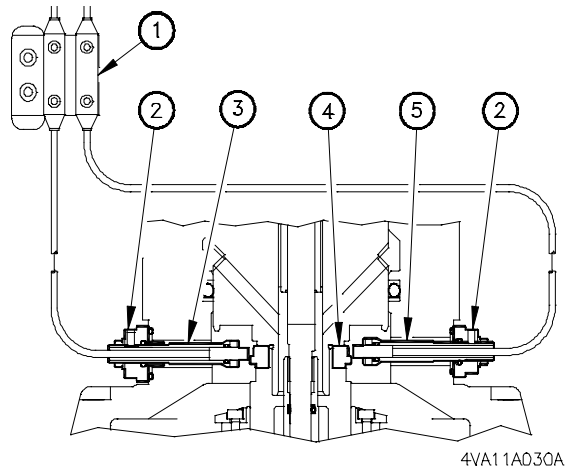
TOOL CONFIRMATION MECHANISM
